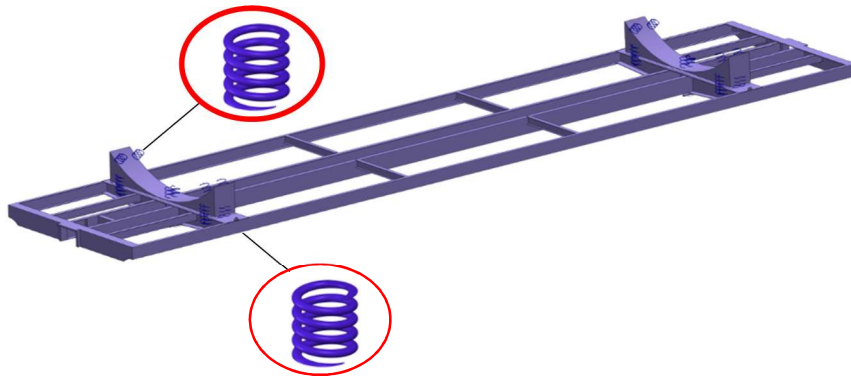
Arrangement of elastic-friction elements on the boiler bearings and between boiler bearings and the boiler bearer
